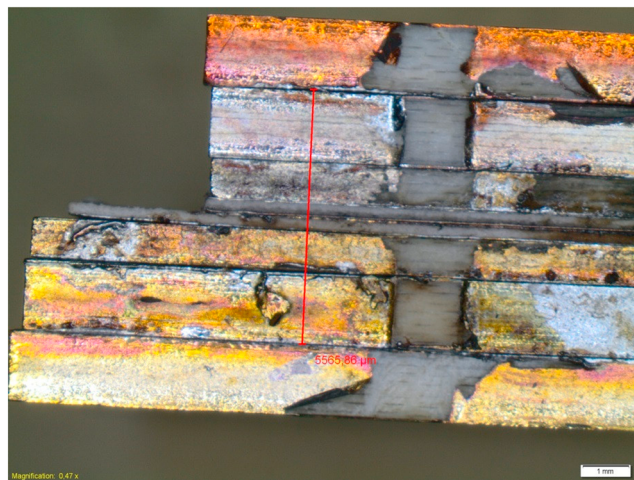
Front view of the assembled back-to-back transition. Point of view is marked with an arrow in Figure 15. The measured width of the ESIW is 5.6 mm.
